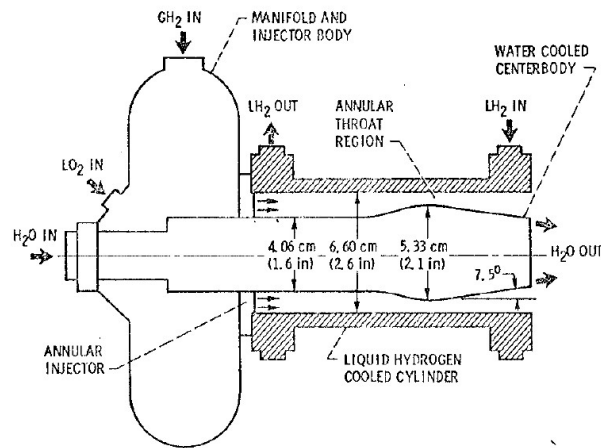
Schematic of cylindrical thrust chamber assembly.
